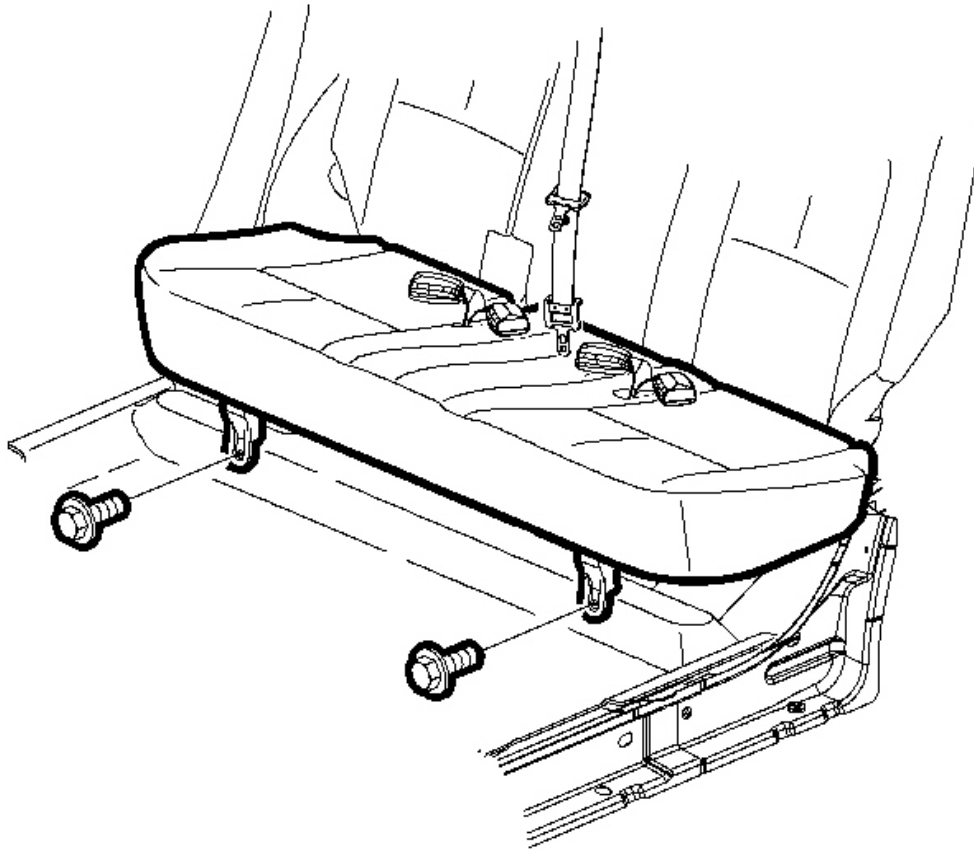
Removing/Installing Rear Seat Forward Fasteners
